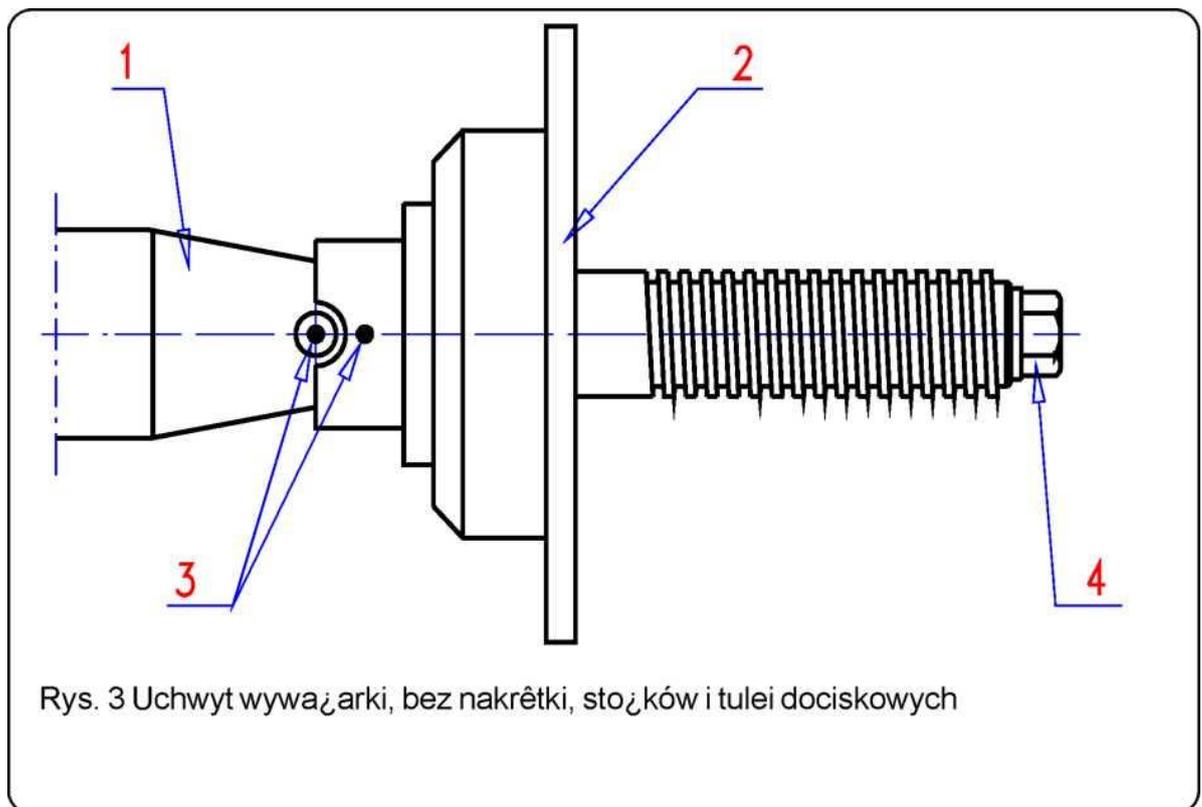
Adapter of the balancer, without the nut, cones and clamping sleeves
